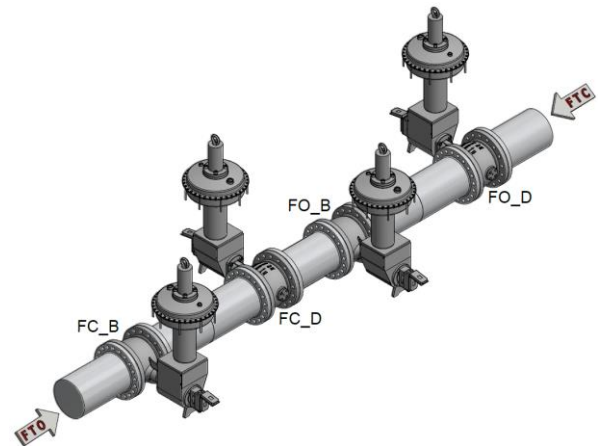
Installation positions in horizontal pipeline / Valve with Type MD, MZ Actuator
